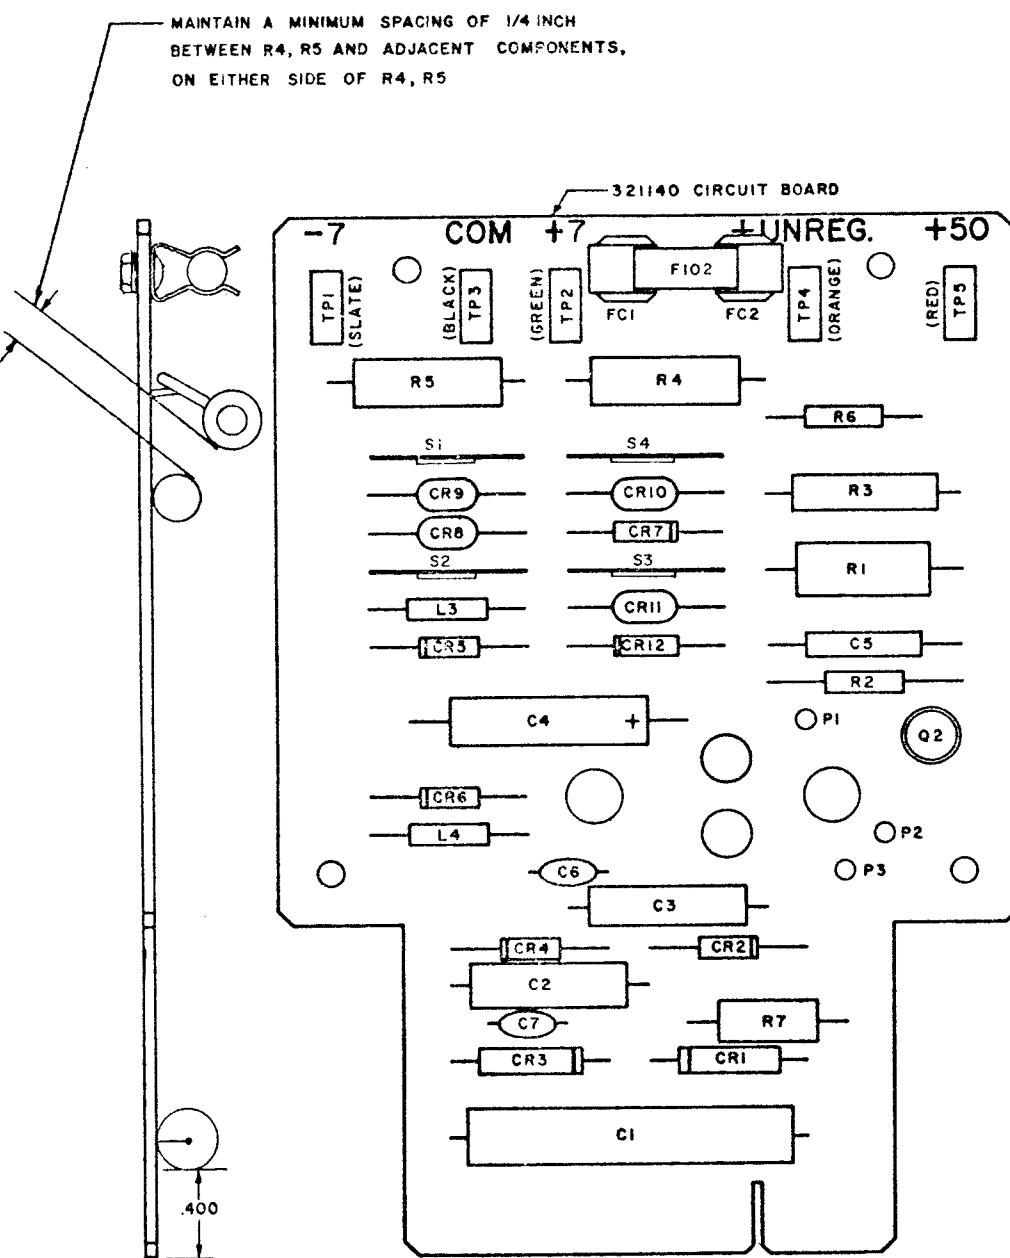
Assembly Drawing; Model 28 CPP KSR and RO
